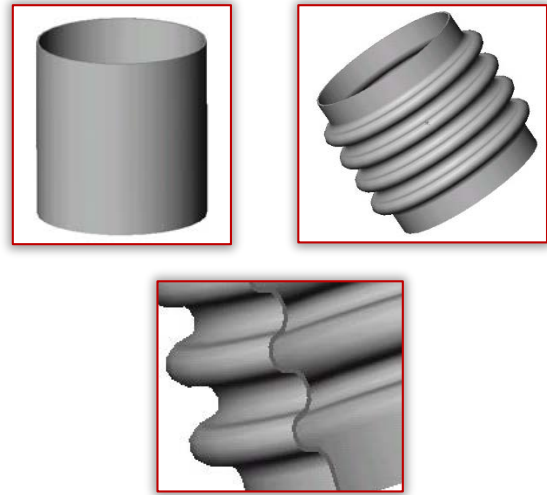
Workpiece a) and finished part b) with geometry of final cross section
